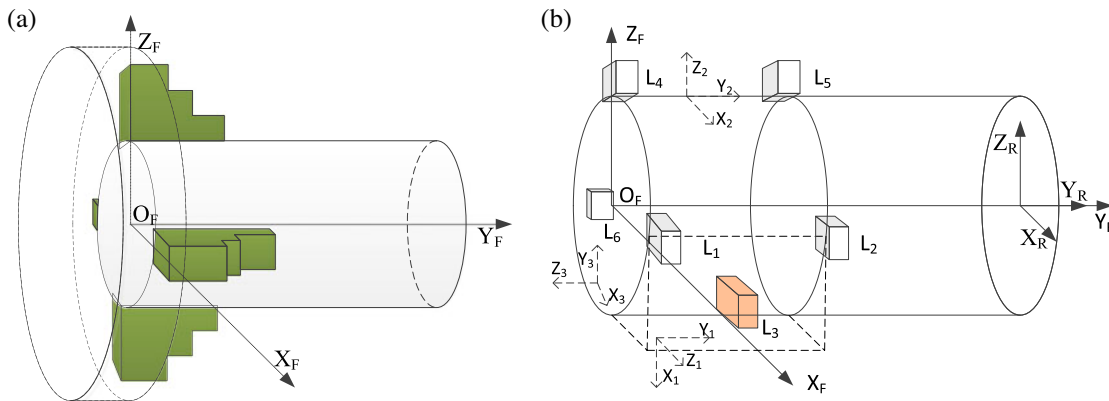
Locator analysis of turning process. (a) fixture scheme and (b) locators illustration.
